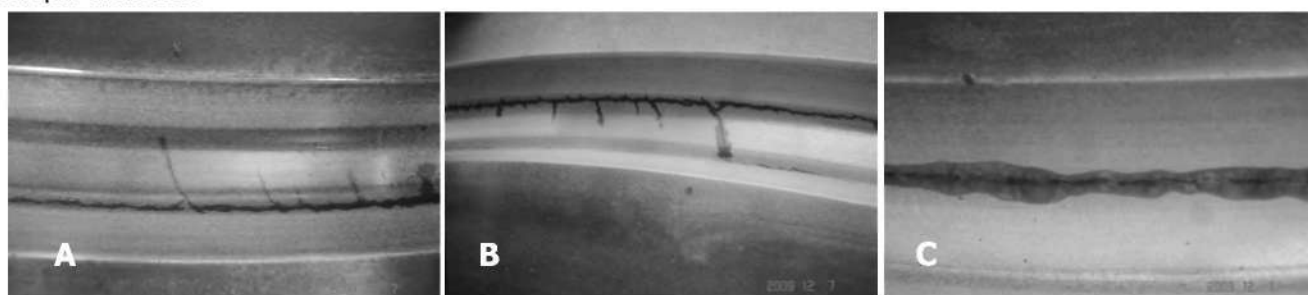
Multiple cracks observed at RTJ groove of the top manway flange (A) Outer side of RTJ manway flange- circumferential cracks with transverse cracks (B) Inner side of RTJ manway flange- circumferential cracks with transverse cracks (C) Outer side of RTJ manway flange- circumferential cracks
